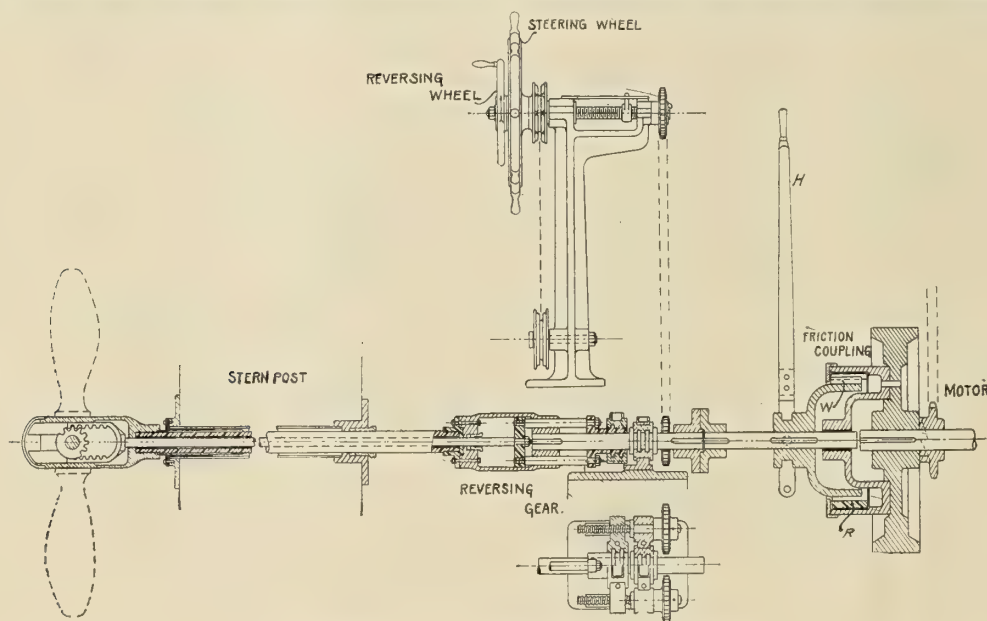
COUPLING AND REVERSING GEAR OF DAN MOTOR.
